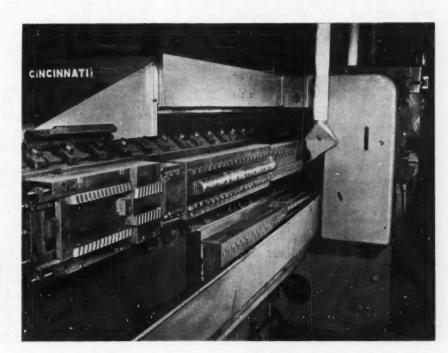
About 200 carbide-tipped bits are required on both of the broaches employed on the machine illustrated in Fig. 8
